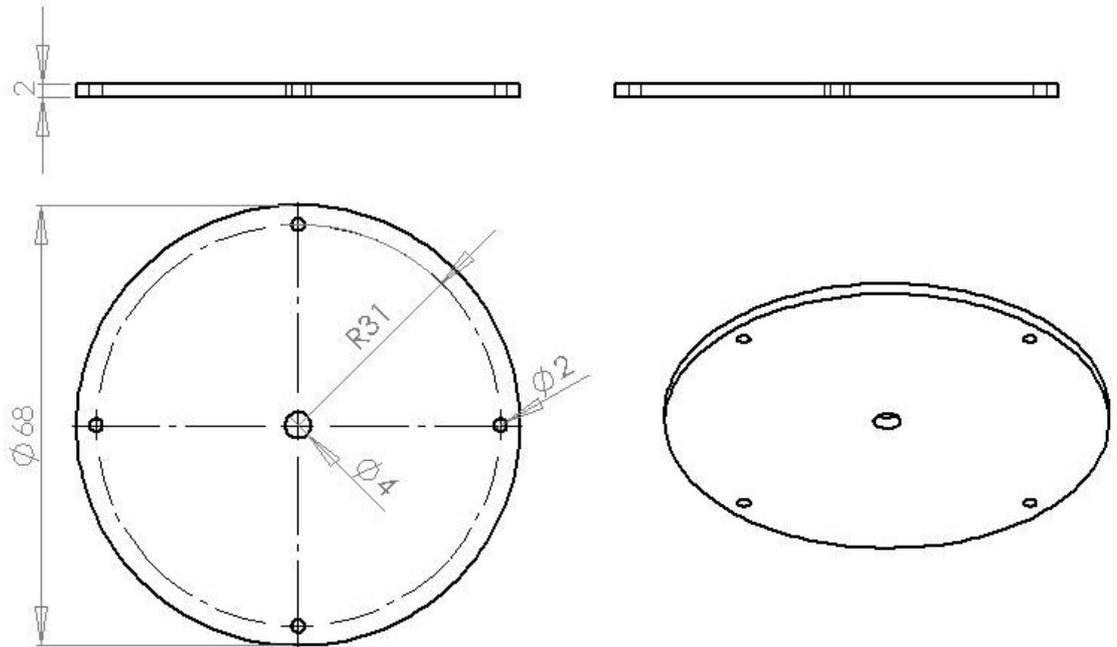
CAD drawing of bottom part of PVC disk for soft shell prototype.
